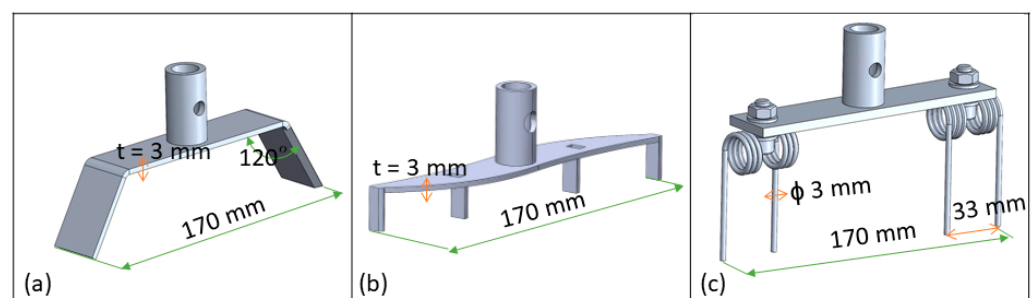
Designed tools with main dimensions: (a) tool 1; (b) tool 2; (c) tool 3.
